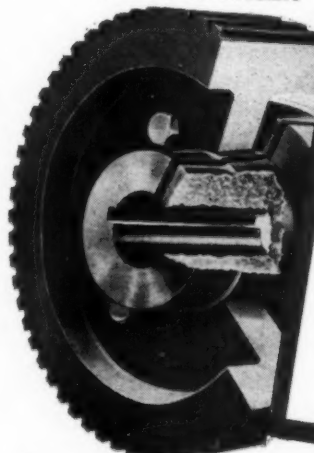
Cutaway view of Timing belt pulley equipped with "QD" hubs.
